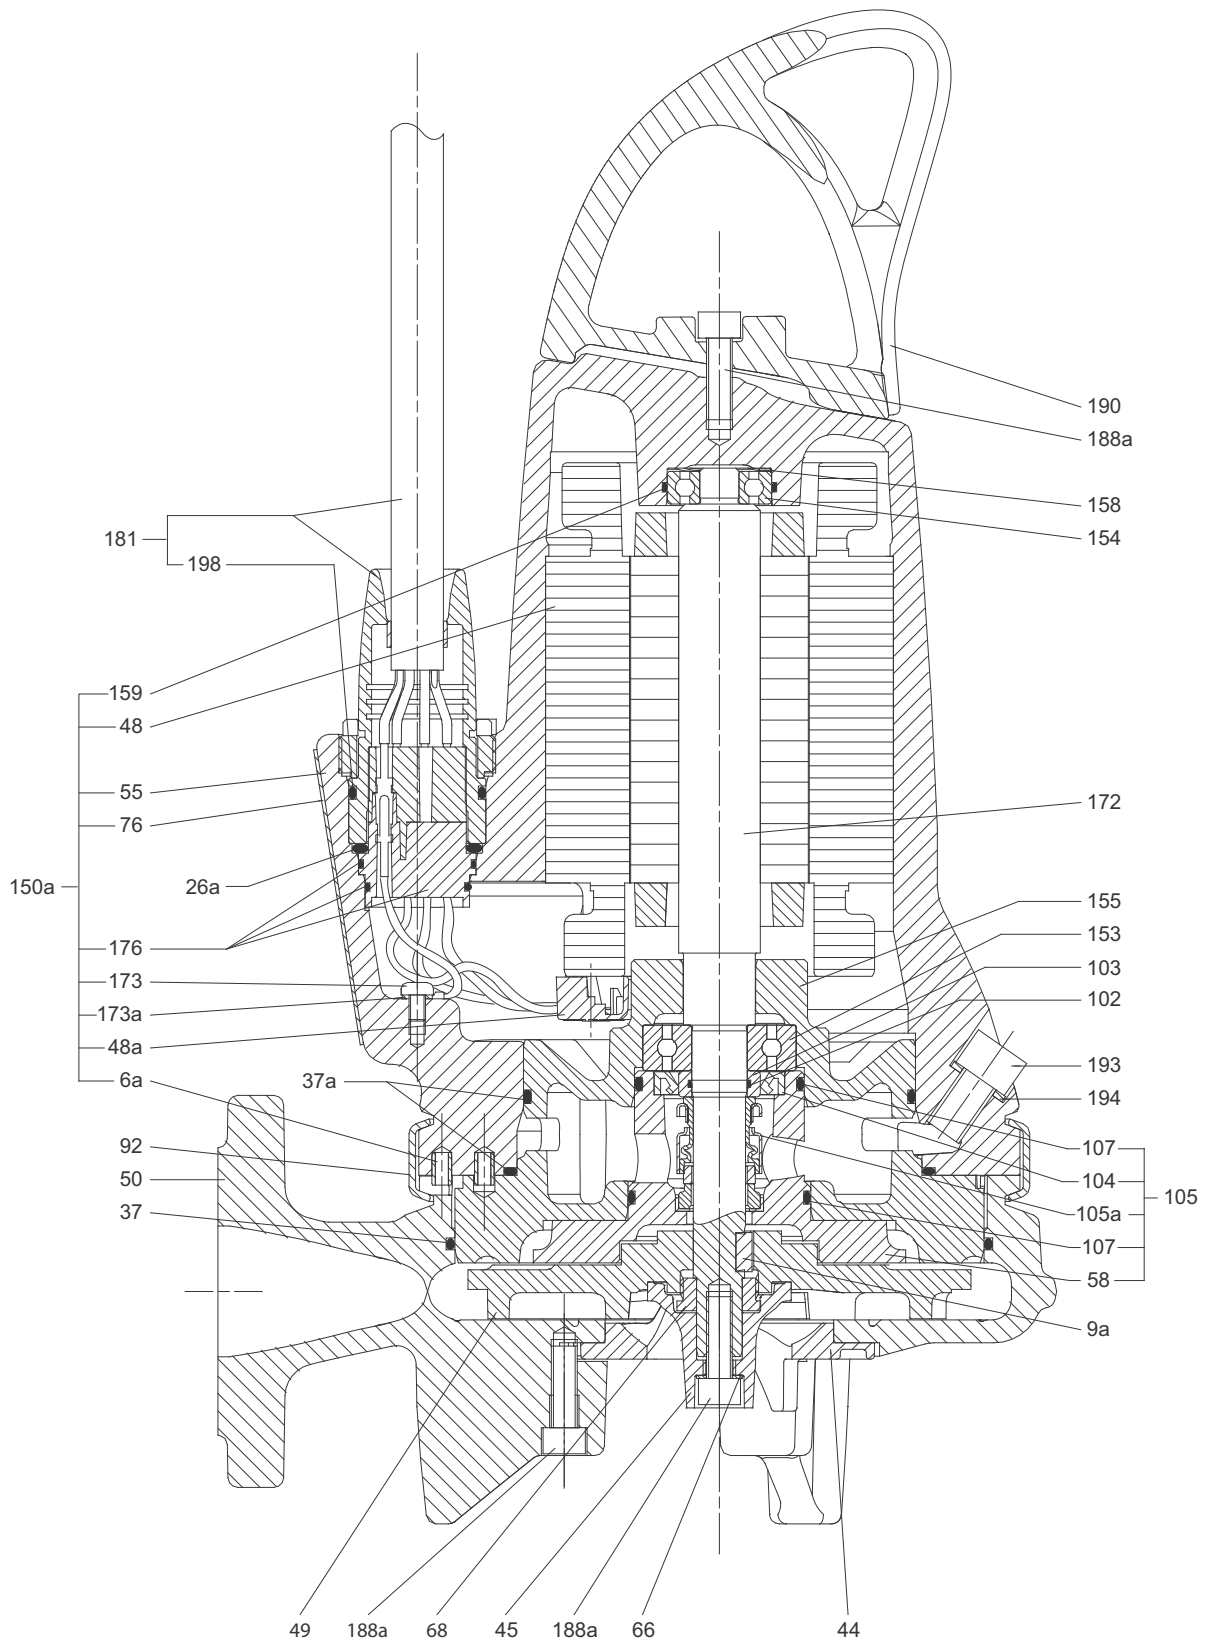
Sectional drawing of SEG pumps, 0.9, 1.2 and 1.5 kW
